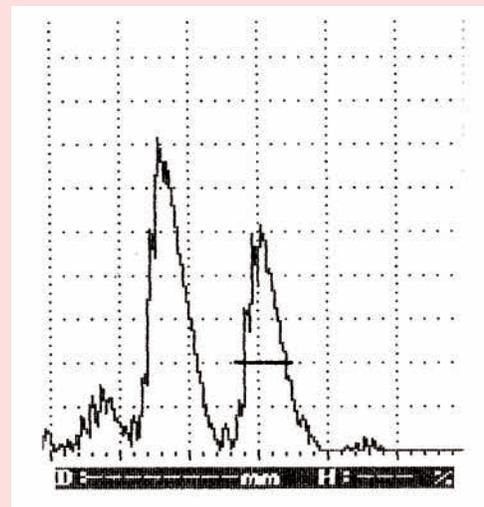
Signal from a defective weld with partial fusion
